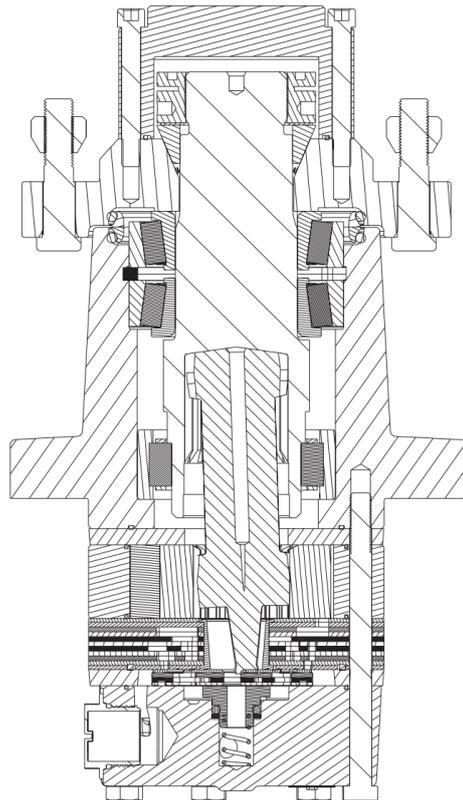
DT 740 Hydraulic Motor with Wheel Hub
